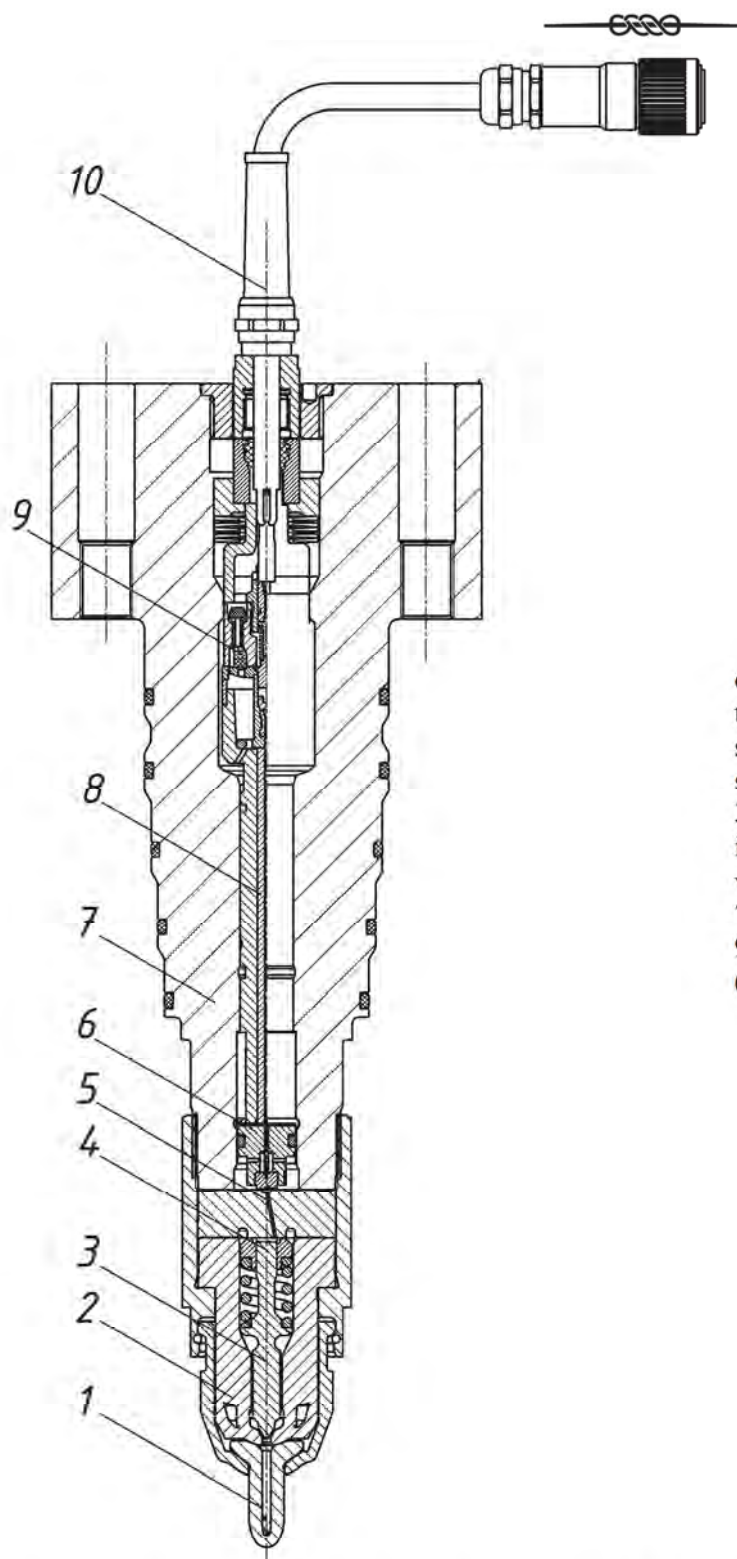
An injector with electrohydraulic control used in low-speed engines of the X-35 series from WinGD equipped with a second generation accumulator fuel injection system: 1 – nozzle tip; 2 – nozzle housing; 3 – nozzle shut-off valve; 4 – hydraulic locking piston; 5 – throttle channel; 6 – unloading valve of the hydraulic shut-off chamber; 7 – fuel injector housing; 8 – pusher rod; 9 – solenoid valve; 10 – electrical connector (adapted from [57])
